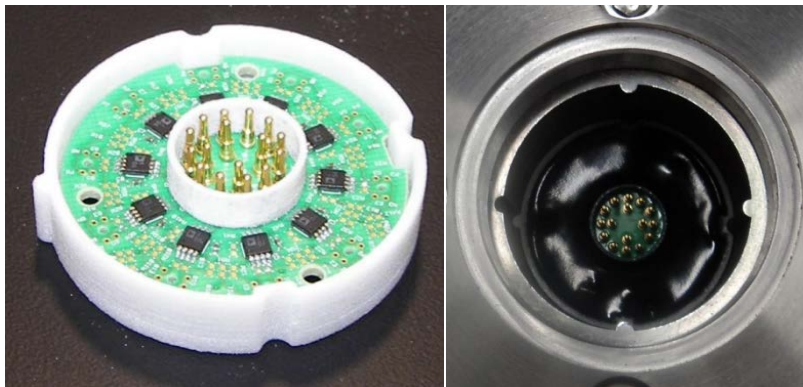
Pressure board in its SLS support (left) and after potted installation (right).
